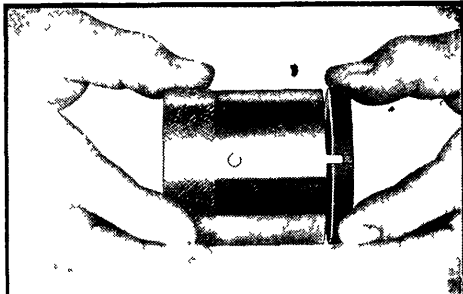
G Squaring seal ring on locators of aligning tool, 1939-52
